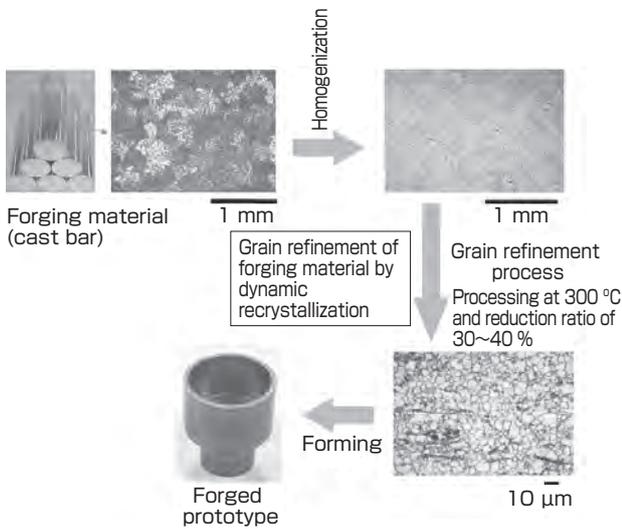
Outline of the forging process for magnesium alloy continuous cast bar
